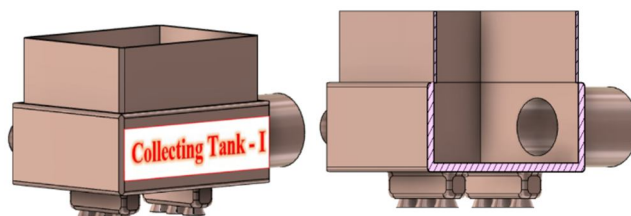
On left: Isometric View; On Right: Cross sectional View of Collecting
